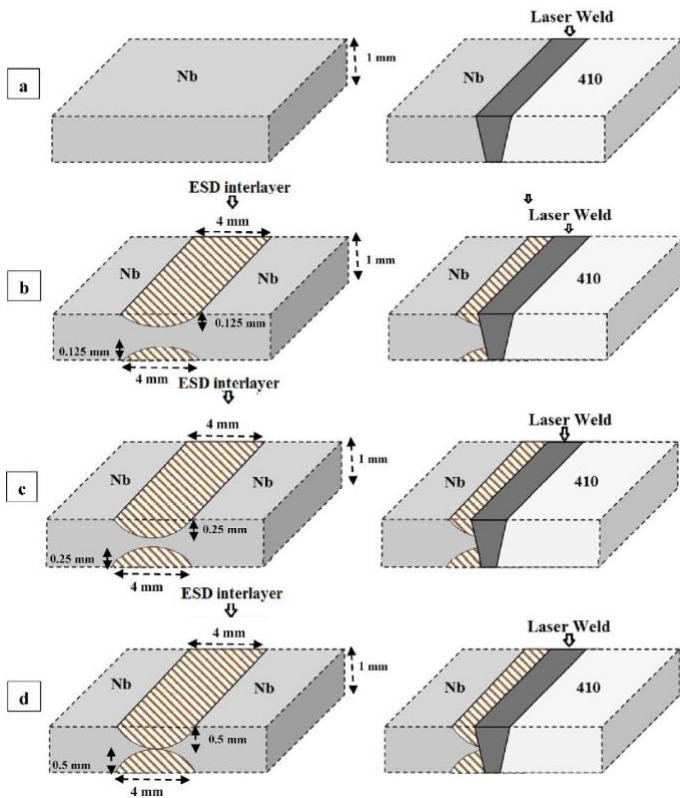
Schematic of laser welding Nb plate with different nominal ESD interlayer thicknesses to 410 stainless steel. a- No interlayer, b- 0.25 mm thick, c-0.5 mm thick, d-1 mm thick.
